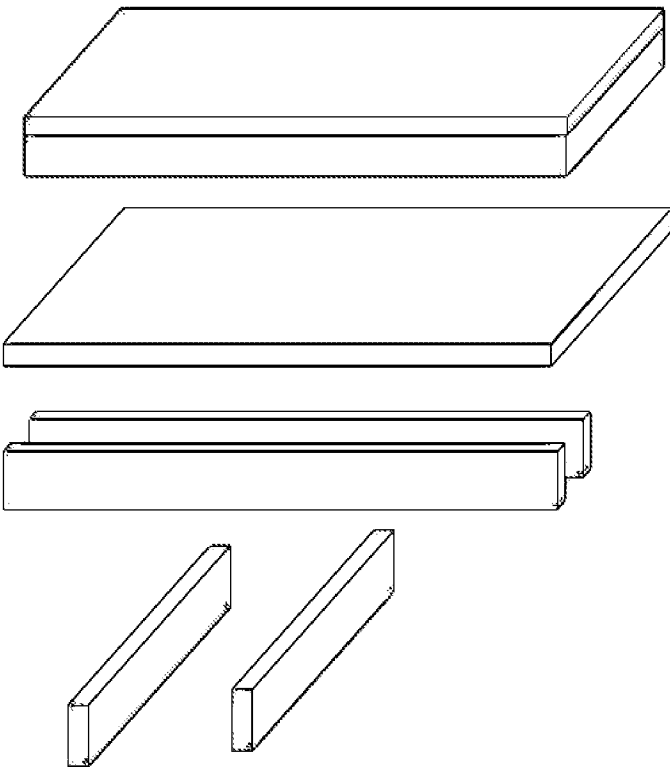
7 Zone Viscoflex Ventilated Mattress Core with Side & End Support Rails
